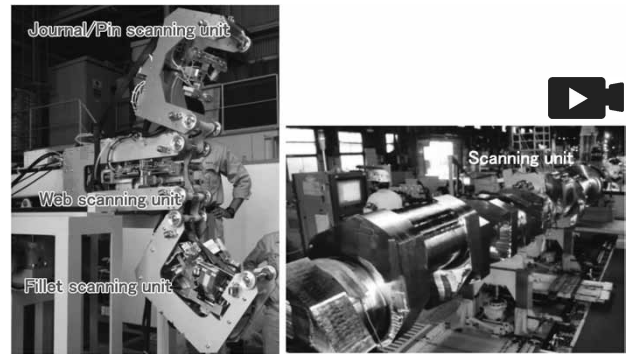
Scanning mechanism of automatic ultrasonic inspection for solid type crankshaft
